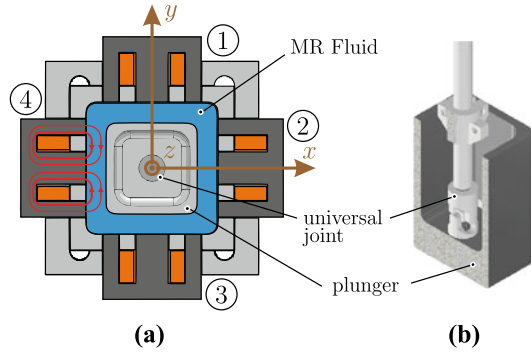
a 2D- and b 3D cut section of the damper to show the joint connection
